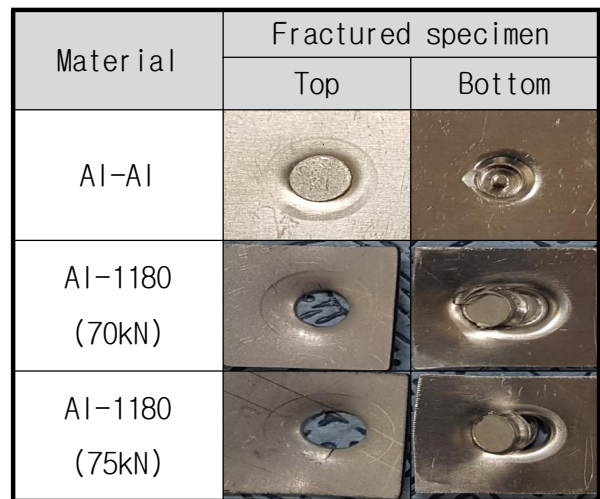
Fractured specimen of SPR joints after tensile shear test
